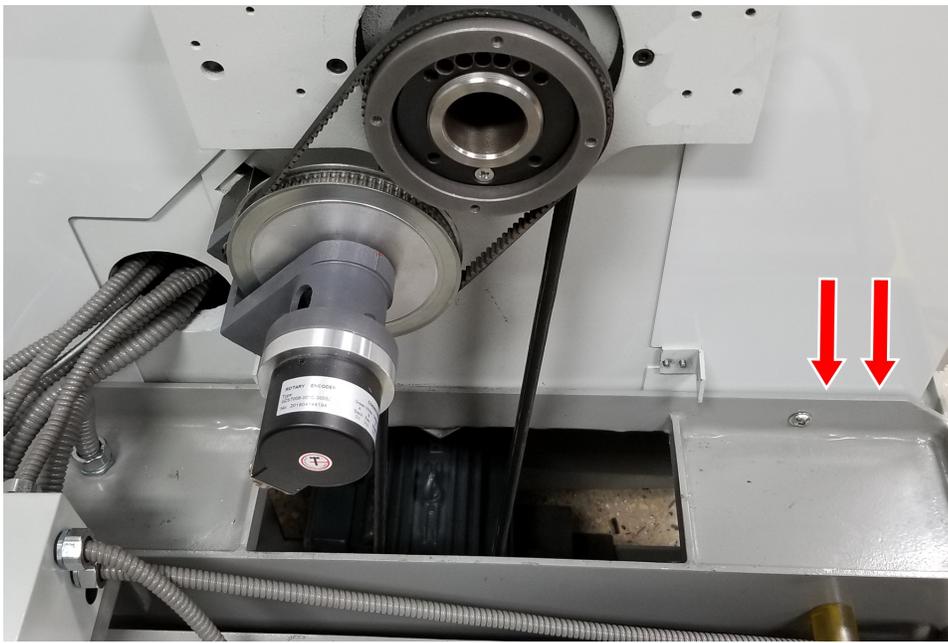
Left side panel installed between the mounting plate and the sheet metal guard.
